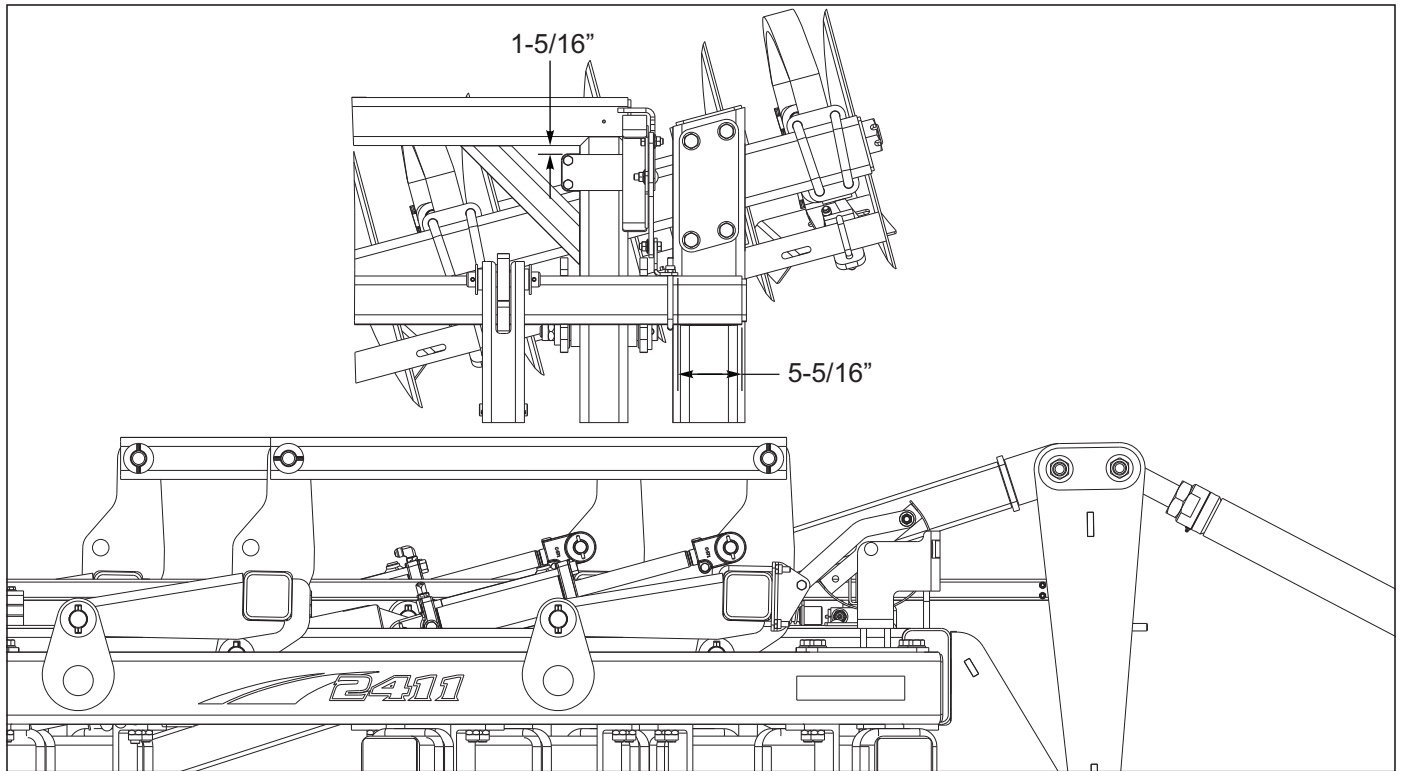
Disc Gang Gauge Adjustment 2411-06
